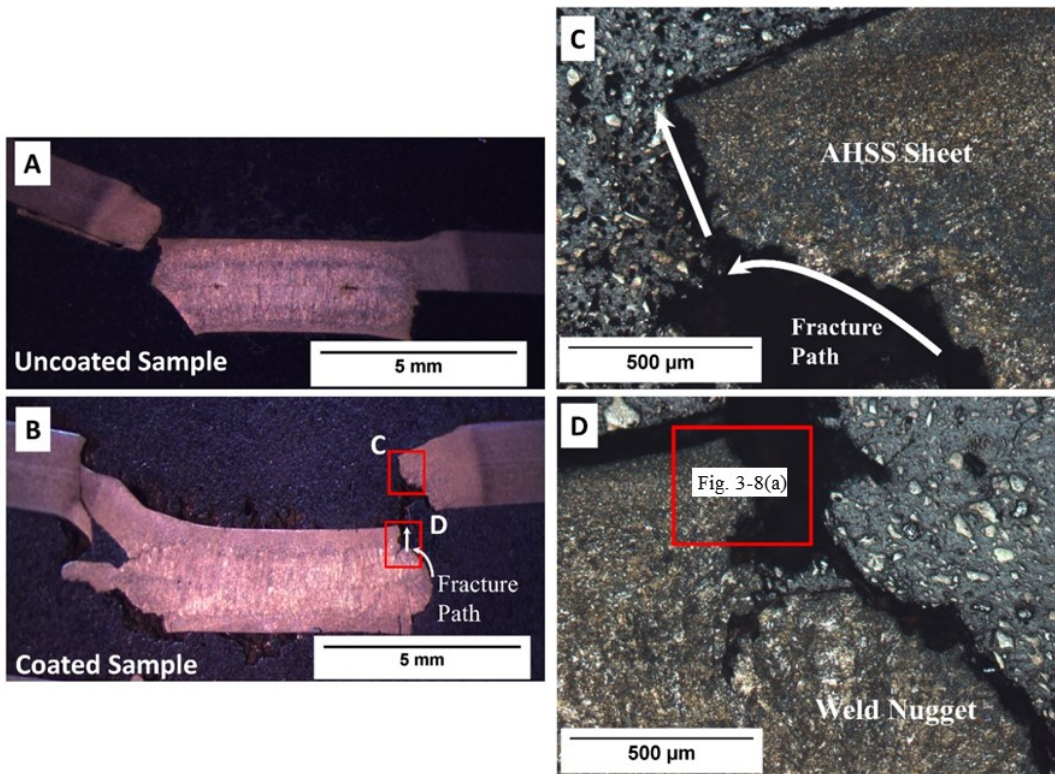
TRIP 1100 nugget and sheet fracture cross sections (A) image of uncoated sample cross section showing the typical fracture morphology for button-pullout (B) image of coated sample cross section showing the unusual shape change in fracture direction (C) high magnification image of fracture path in coated sample sheet fracture (D) high magnification image of coated sample in nugget fracture showing similar fracture path
